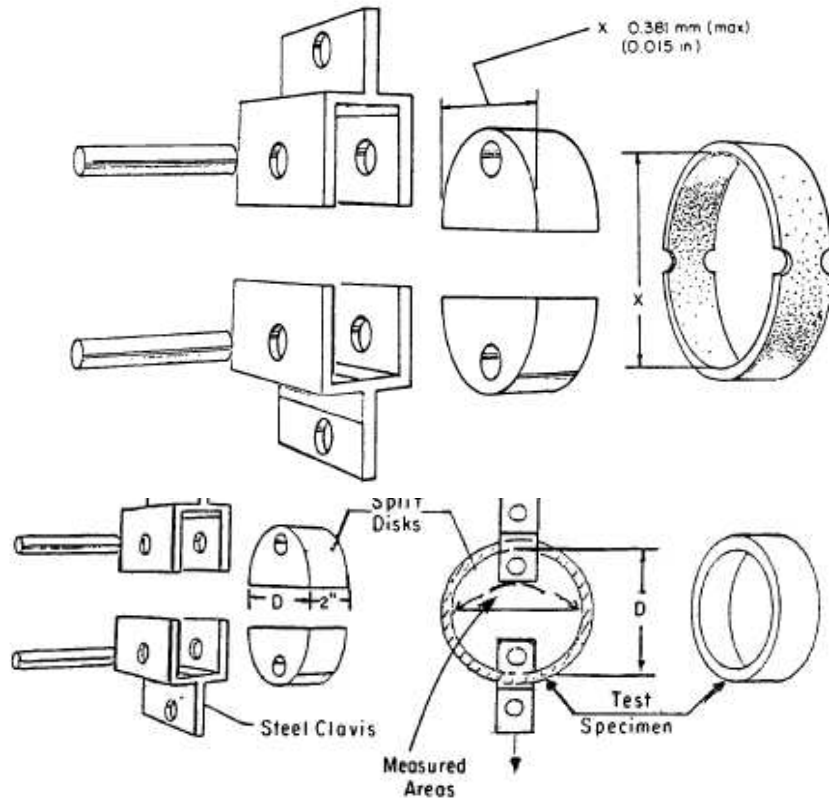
Schematic illustration of the split ring tensile specimen and the test fixture (Taken from ASTM D2290 Specification)
